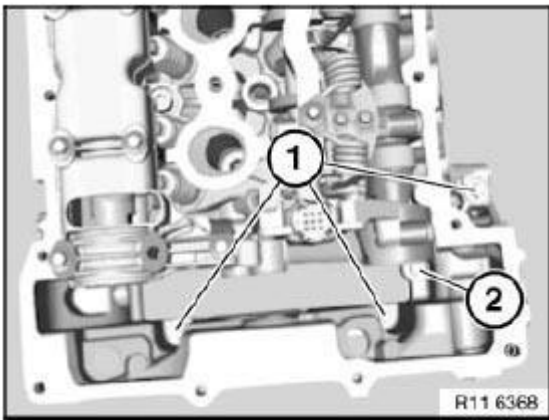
[Identifying Timing Chain Module Bolt And Screw]
